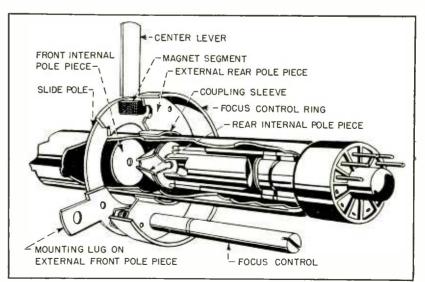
Drawing shows typical positions of internal pole pieces and focus unit mounted externally on neck of tube
